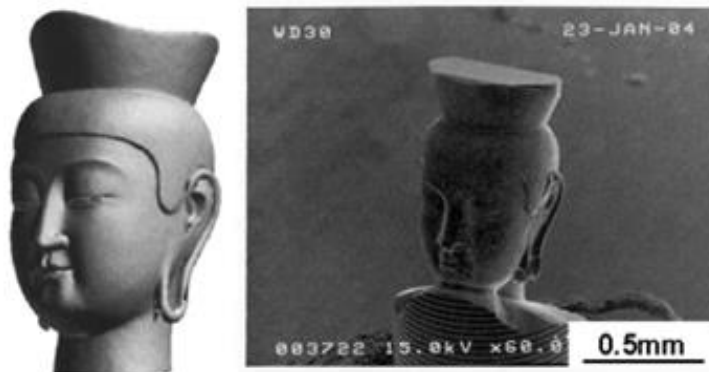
Small statue created by ball end micro milling using a 5-axis machine (Sasaki et al. 2004).
